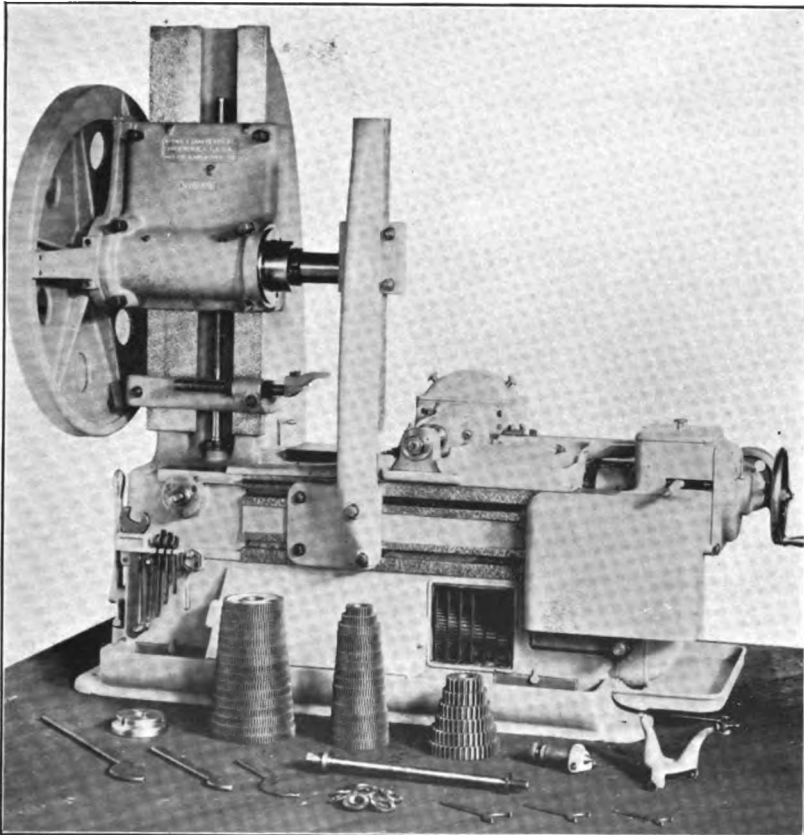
BROWN & SHARPE NO. 6 AUTOMATIC GEAR-CUTTING MACHINE.
